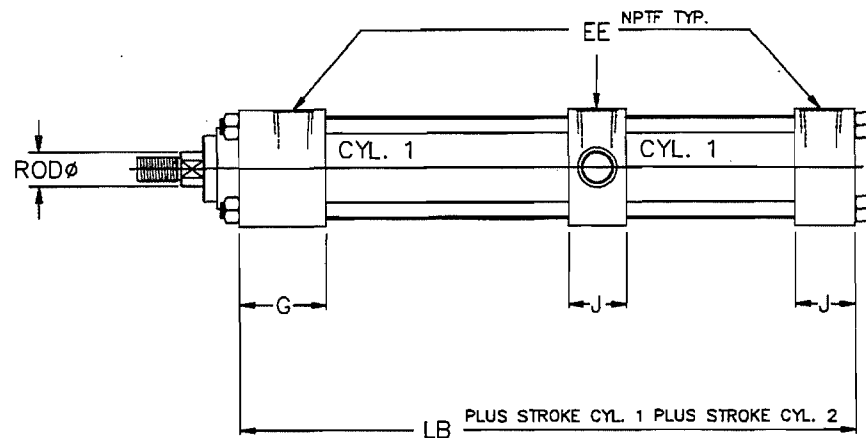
Manufacturer’s Picture of Multiposition Cylinder
